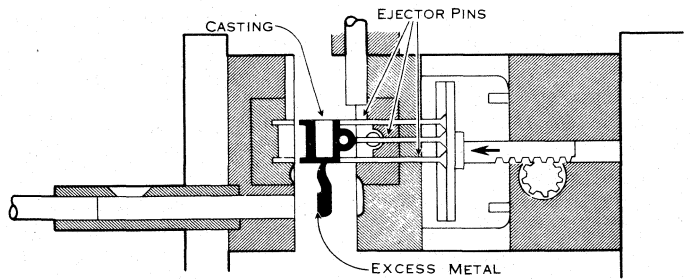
CASTING AND EXCESS METAL FORCED OUT OF THE DIE-CASTING MACHINE BY EJECTOR PINS
